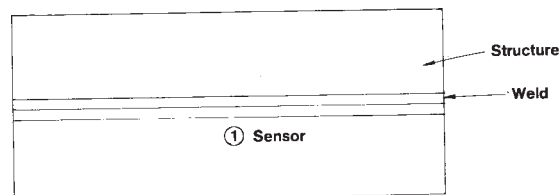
Typical Sensor Placement for Single Channel AE Monitoring of a Linear Weld
